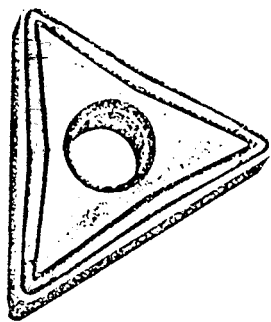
Triangular carbide tool insert with chip-breaking grooves molded into the rake face. (After Kaldor, Ber, and Lenz 1979.)
